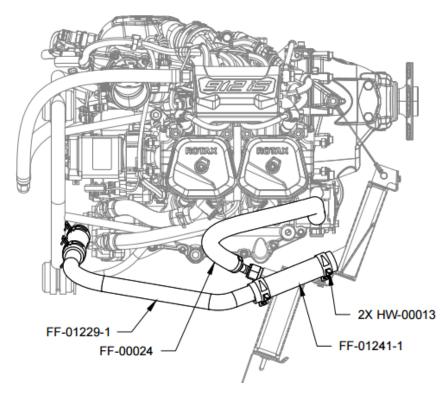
Radiator and Oil Cooler Tube and Hose Install – Right Side
